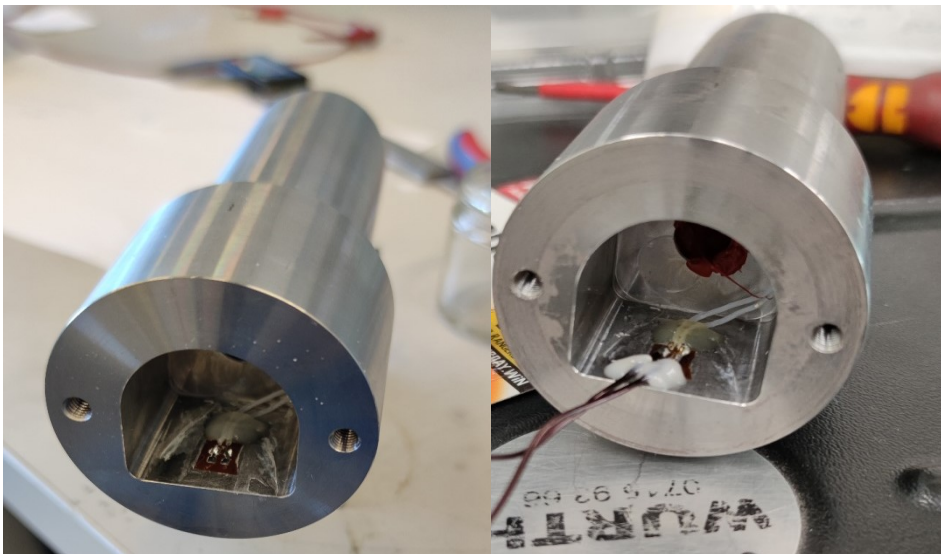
The soldering terminal with wires soldered. Adhesive added on both sides to limit strain to the terminal.
